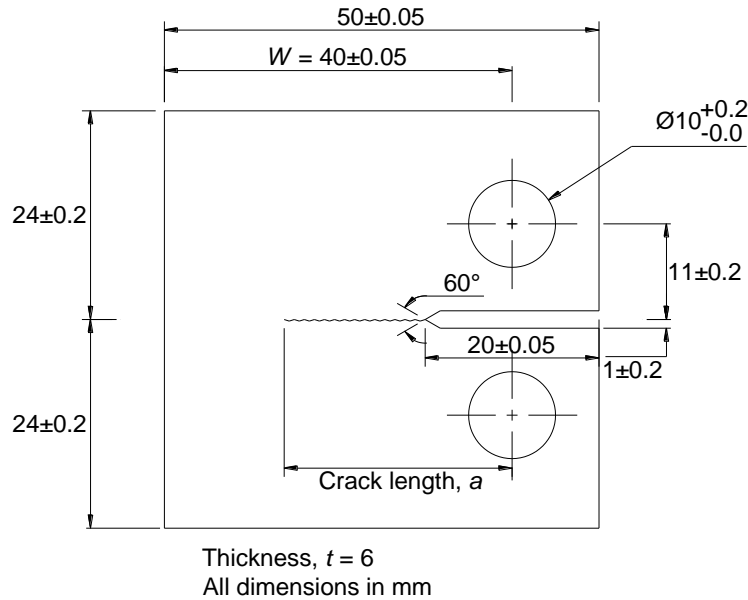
Engineering drawing of the used compact tension (CT) specimen in the current work. It should be noted that the crack length a and width of the specimen W are measured from the centerline of the loading holes.
